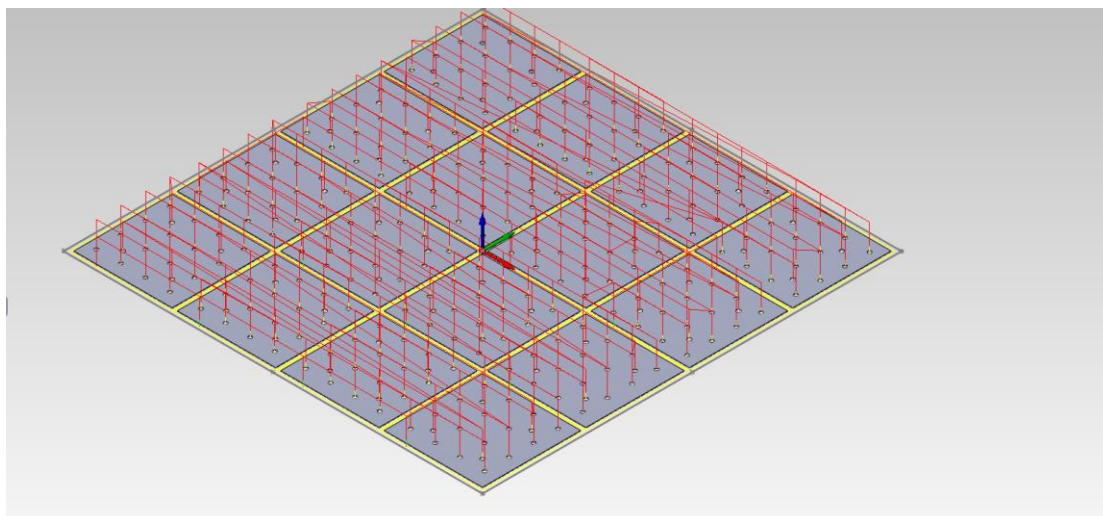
CAD/CAM design of 80WCu20 plates for machining
